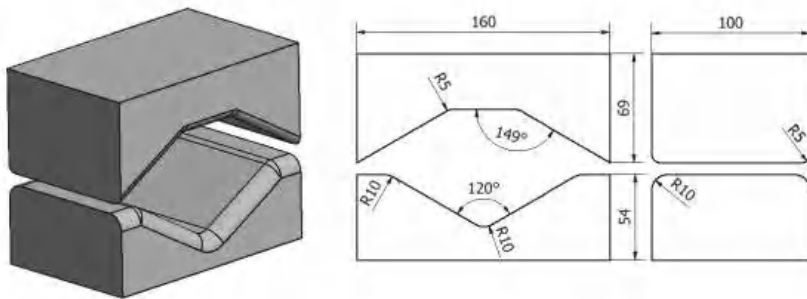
Shape and dimensions of rhombic-trapezoid dies used for AZ91 magnesium alloy forging [15].
